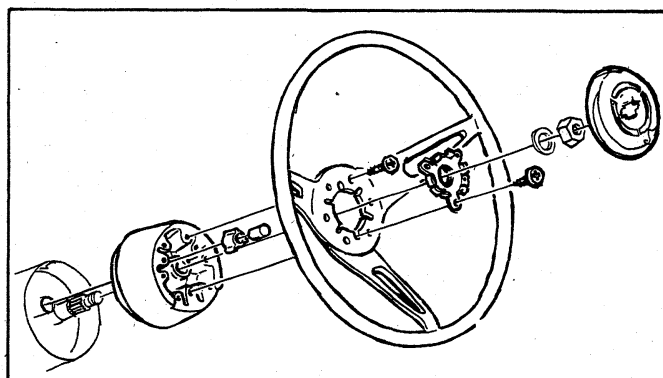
Simulated Wood Steering Wheel and Attaching Parts
